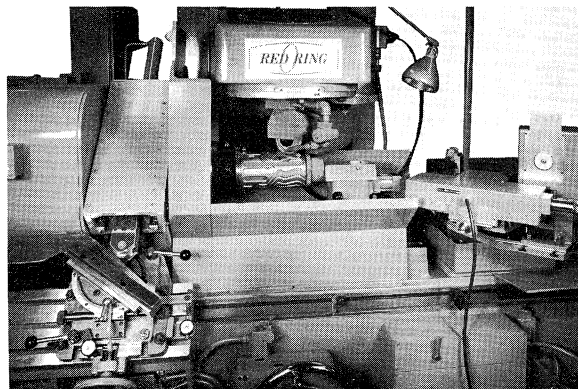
Close-up view of cam nut gear segment automatic tooth grinding operation.
